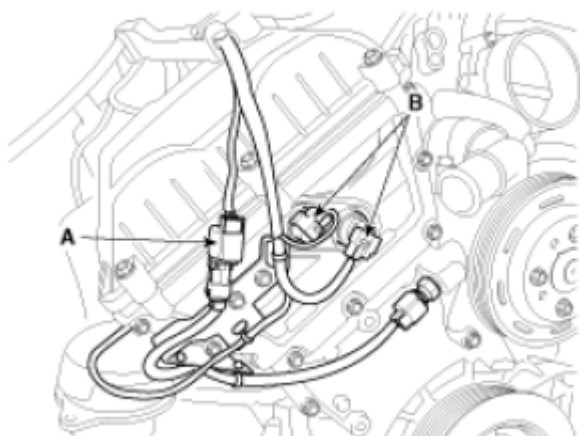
Identifying Engine Coolant Temperature Sensor Connector And CVVT Oil Control Valve Connectors
